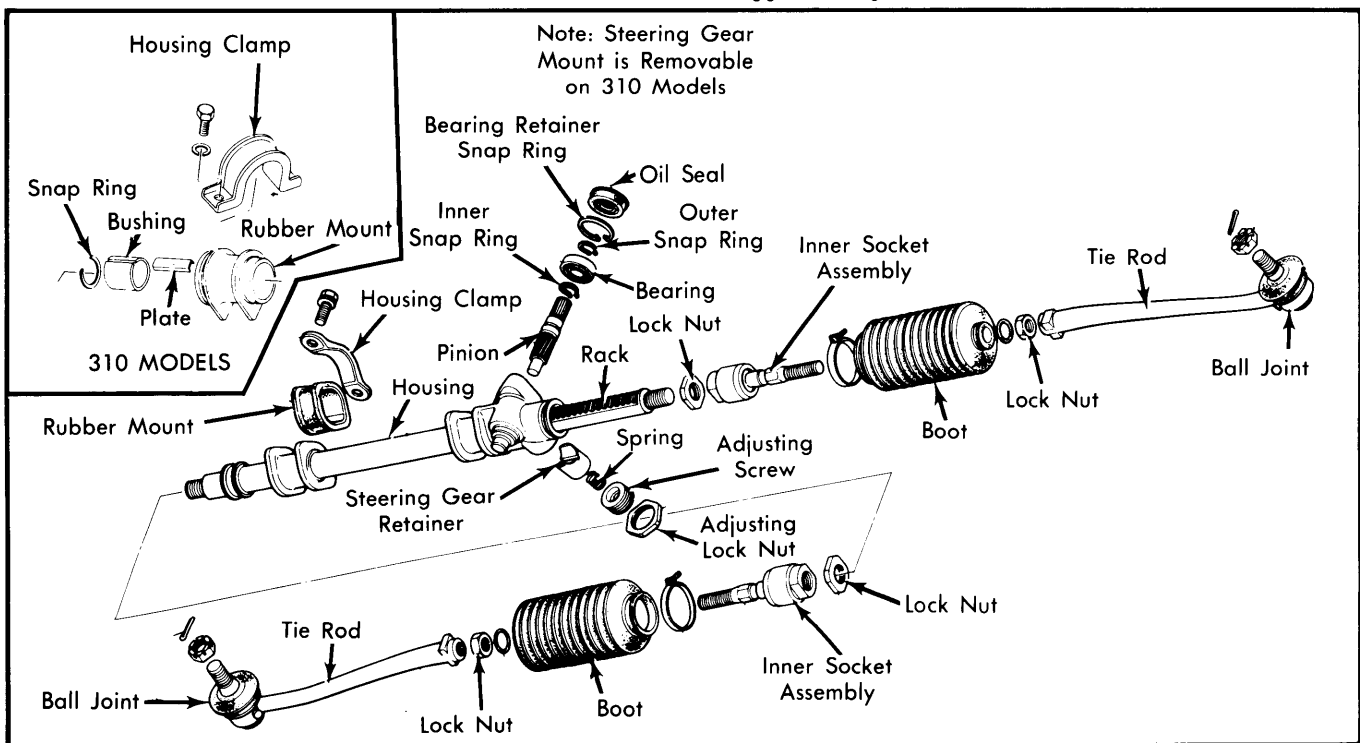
Exploded View of Datsun Rack and Pinion Steering Gear Assembly
